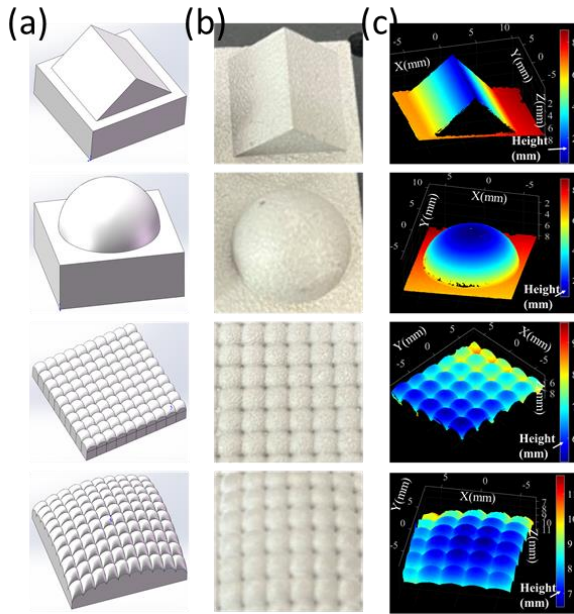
Measurement results of metal additively manufactured parts: (a) CAD models; (b) photographs; (c) point clouds
